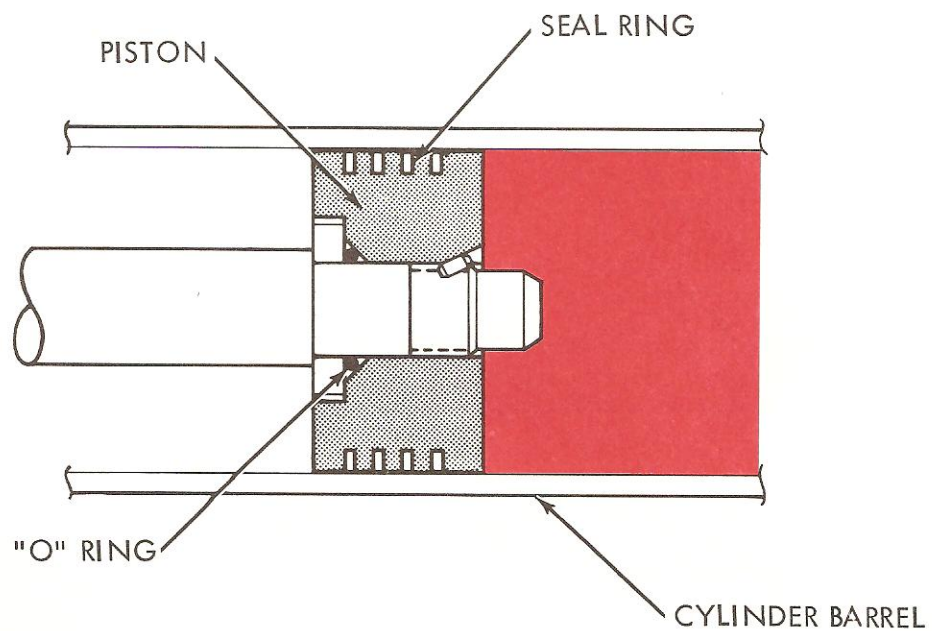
Piston Rings are Used for Cylinder Pistons
